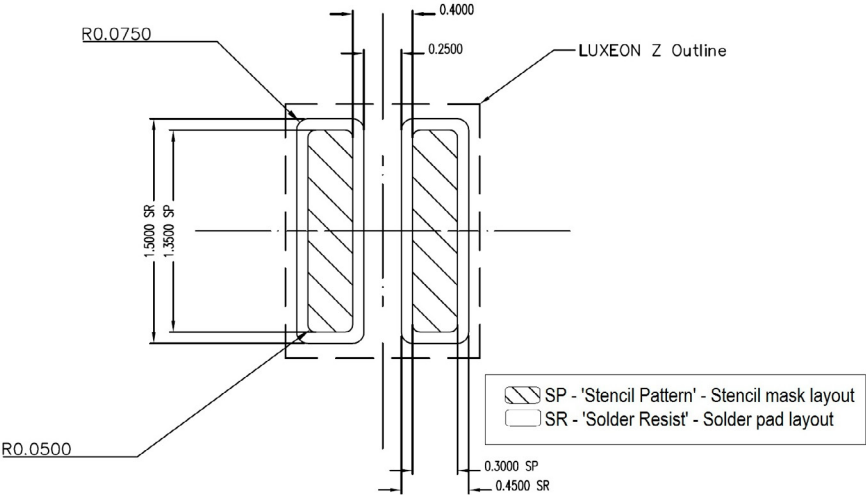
Recommended PCB solder pad layout for LUXEON Z.
